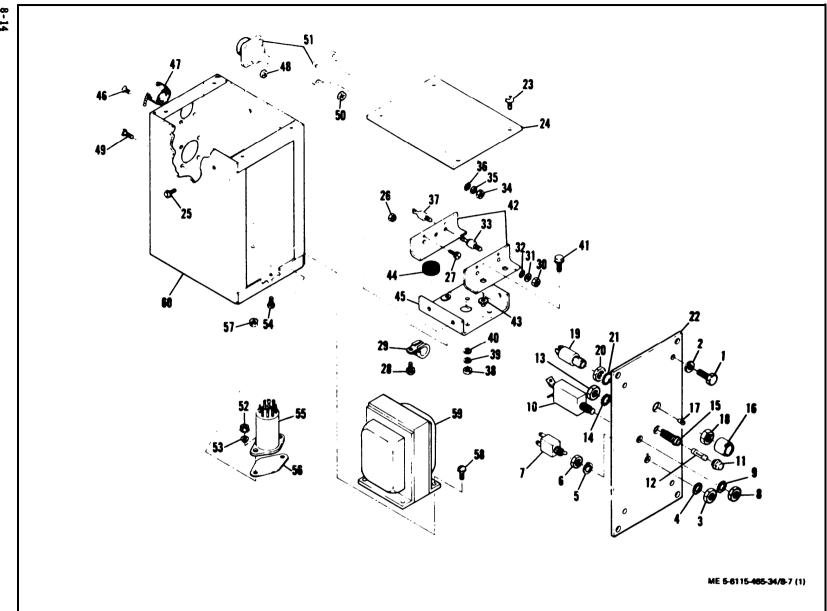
Electric Winterization Kit Heater Control Assembly, Exploded View (Sheet 1 of 2)
